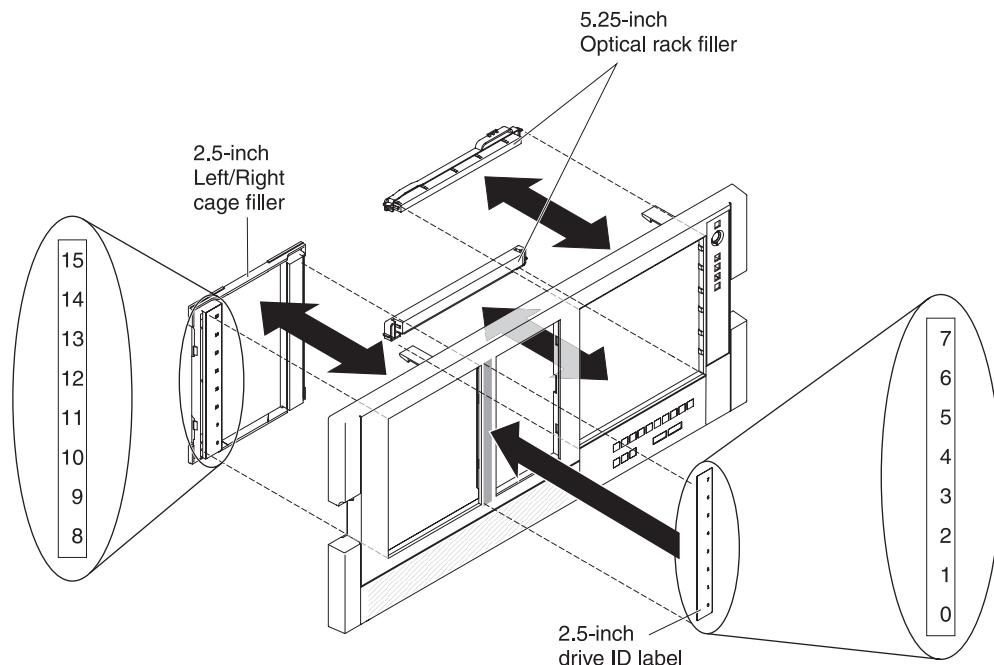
Installing the cage fillers and attaching the drive ID label (models with eight 2.5-inch hard disk drives)
